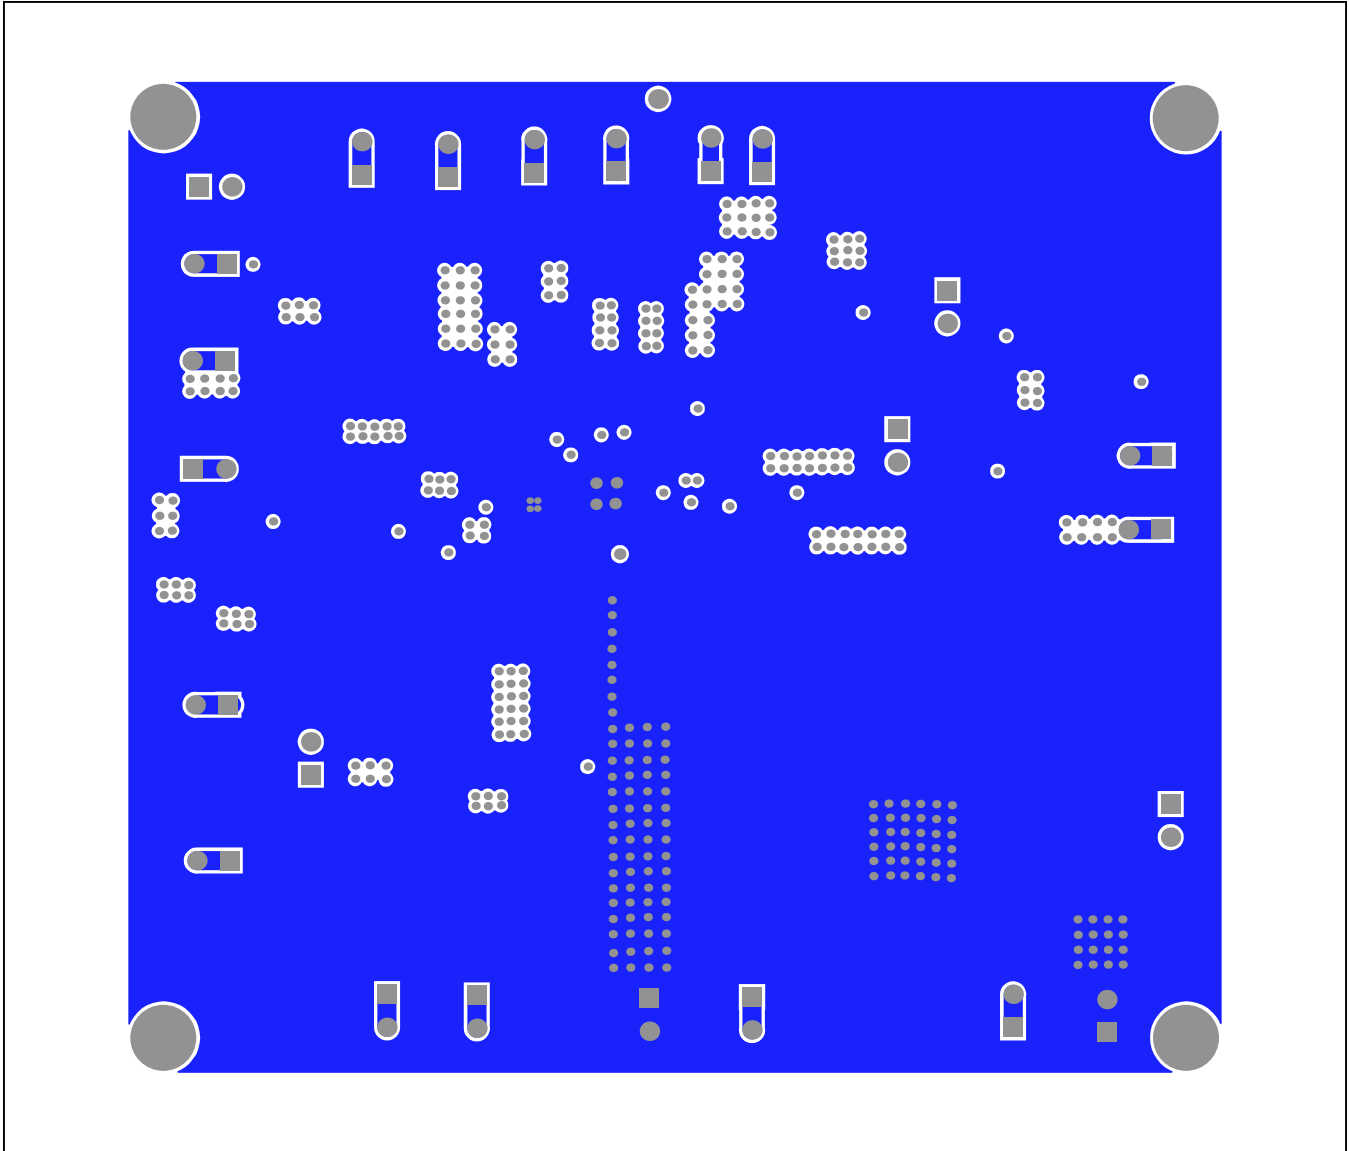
MAX20070 EV Kit PCB Layout—LGND Layer 3
